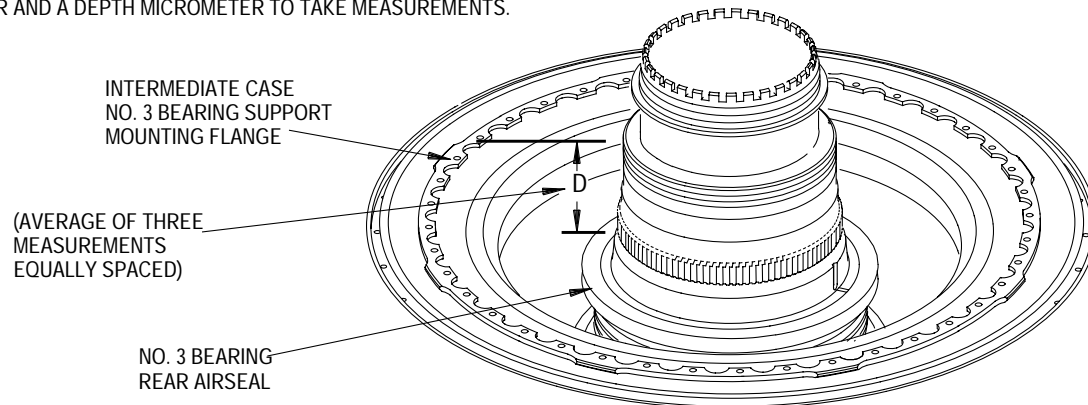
Rear Compressor Rotor Assembly - Setting Running Position (Sheet 1 of 2)
